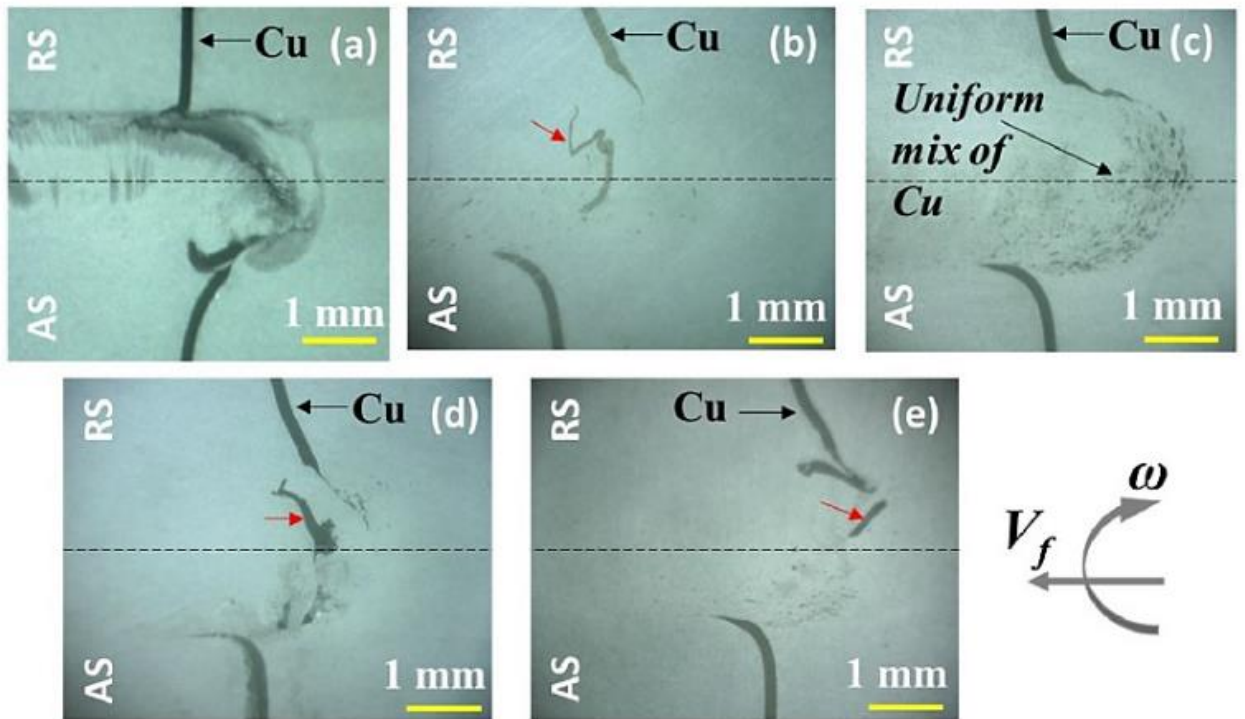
Macrostructure at 3 mm from the top surface of plate at copper inserts location (perpendicular to weld configuration) for (a) Taper cylindrical, (b) Triangular, (c) Square, (d) Pentagon, and (e) Hexagon tool pin profiles [49].
